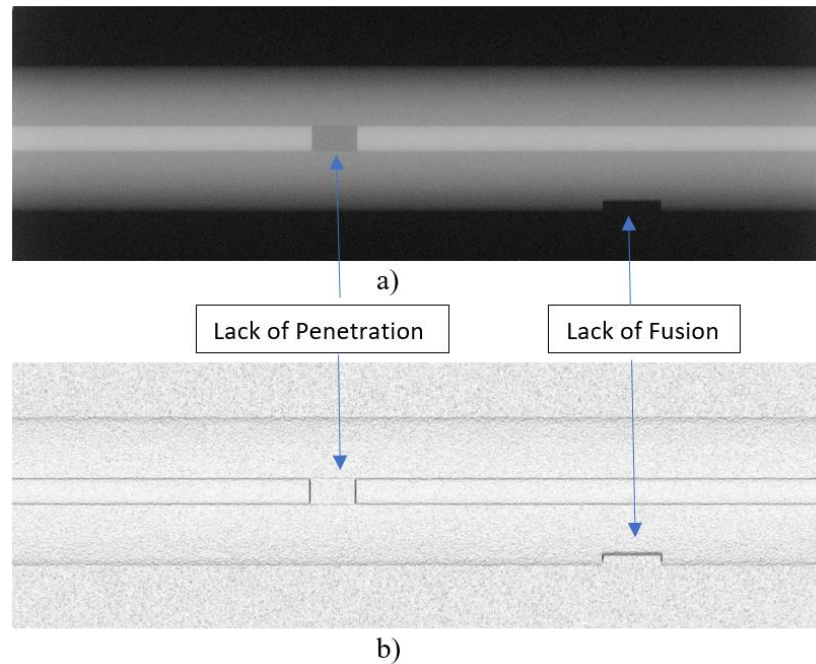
a) Welded plate radiograph using X-ray. b) edge detection profile
